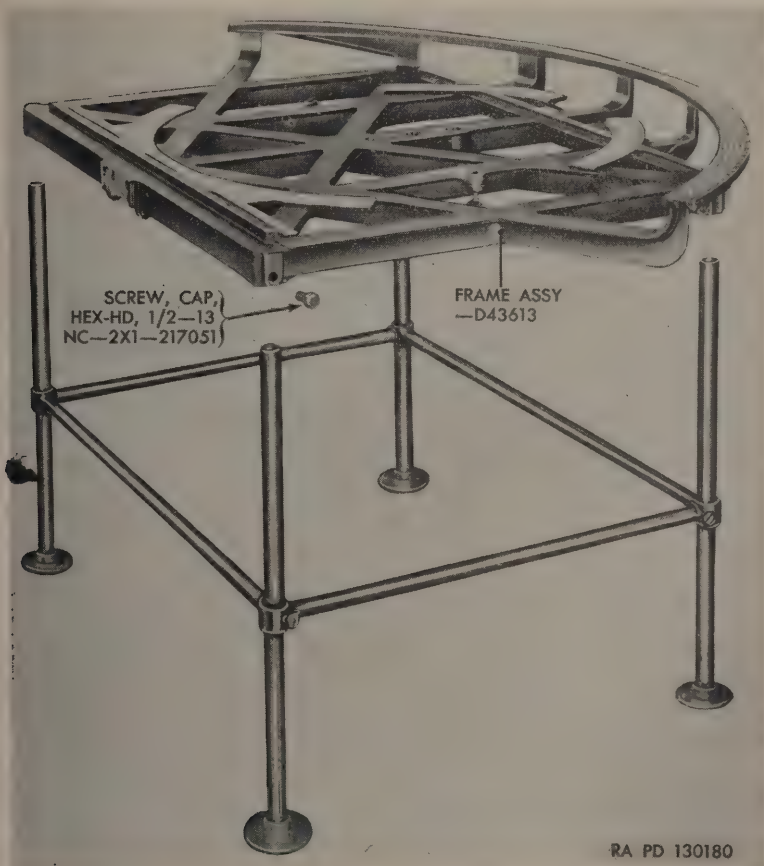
Frame assembly removed from the legs—sound-ranging plotting board M1 or M1A1.
